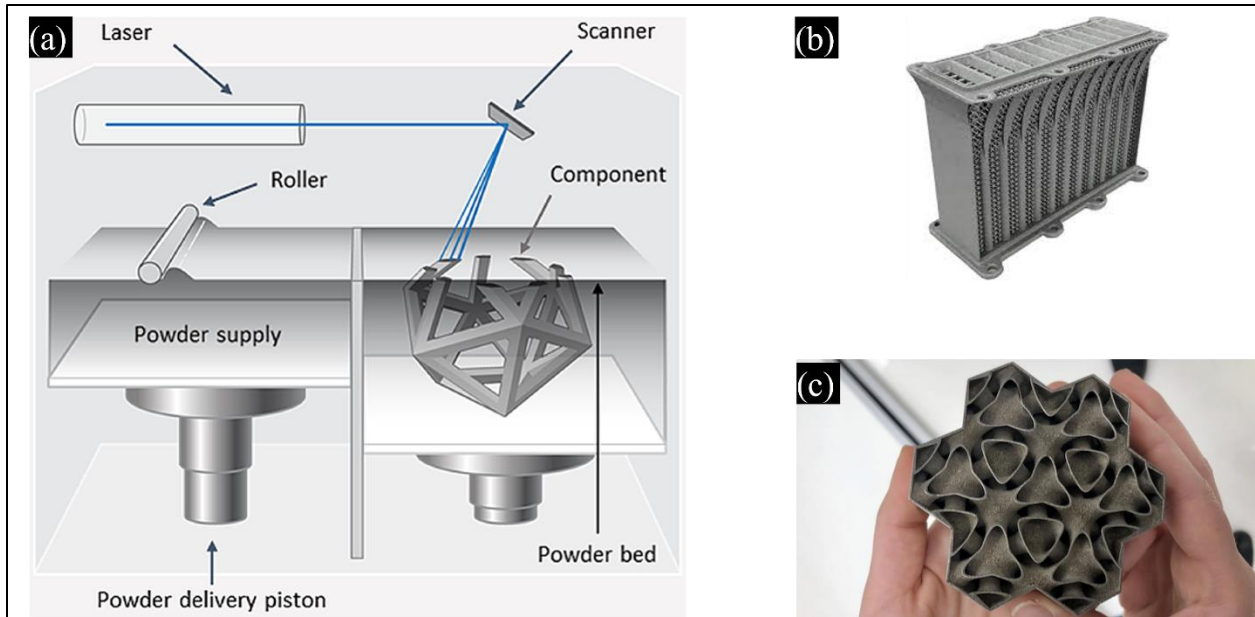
(a) Laser Powder Bed Fusion process [5]; (b-c) examples of LPBF produced complex parts [6,7].
